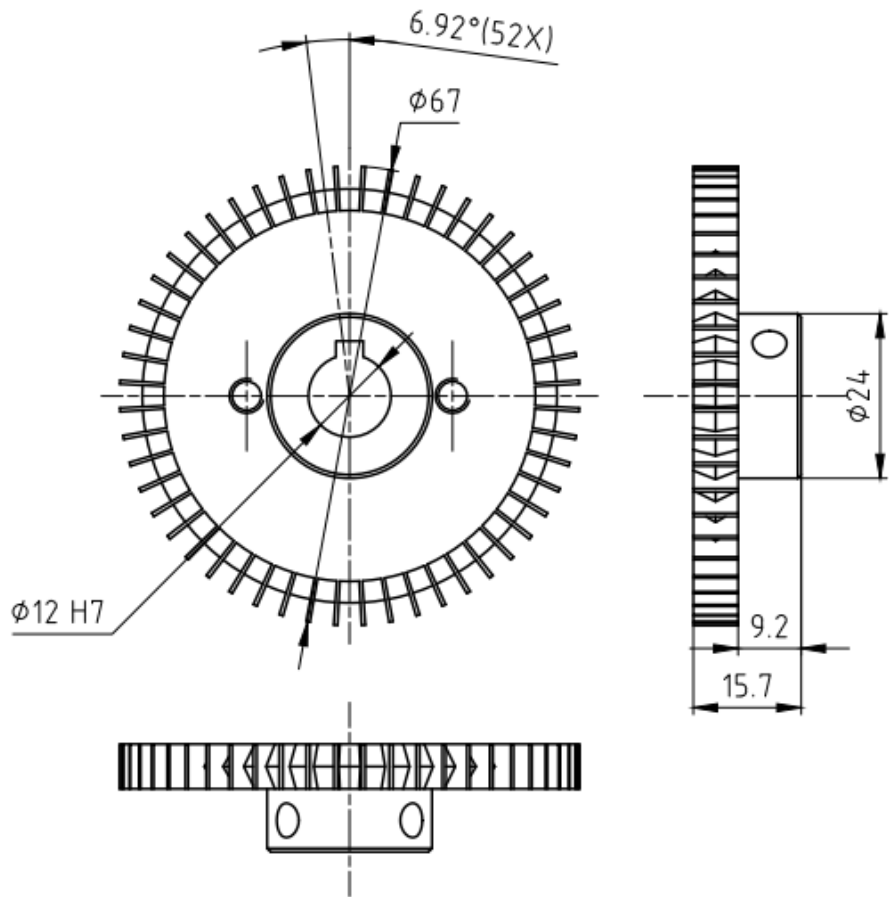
Technical drawing of impeller system- MOMB-DAF-1
